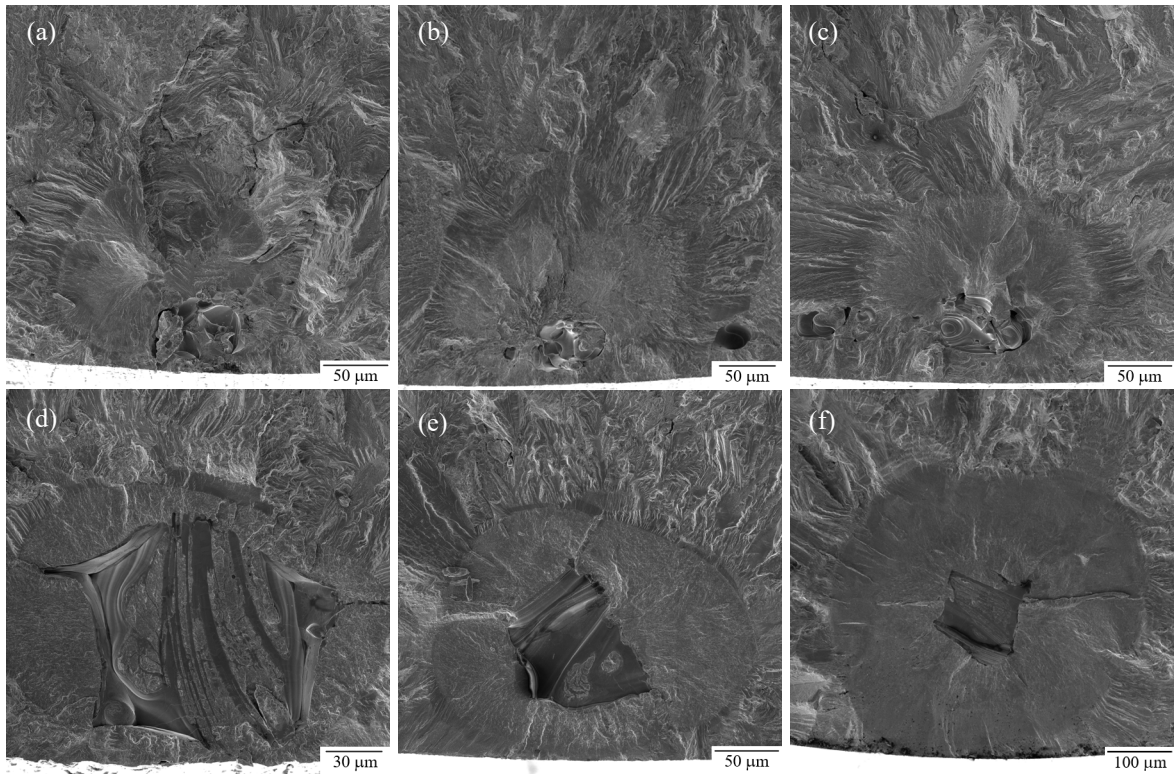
Examples of common initiating defects seen in (a-c) surface removal and (d-f) contour removal samples.
